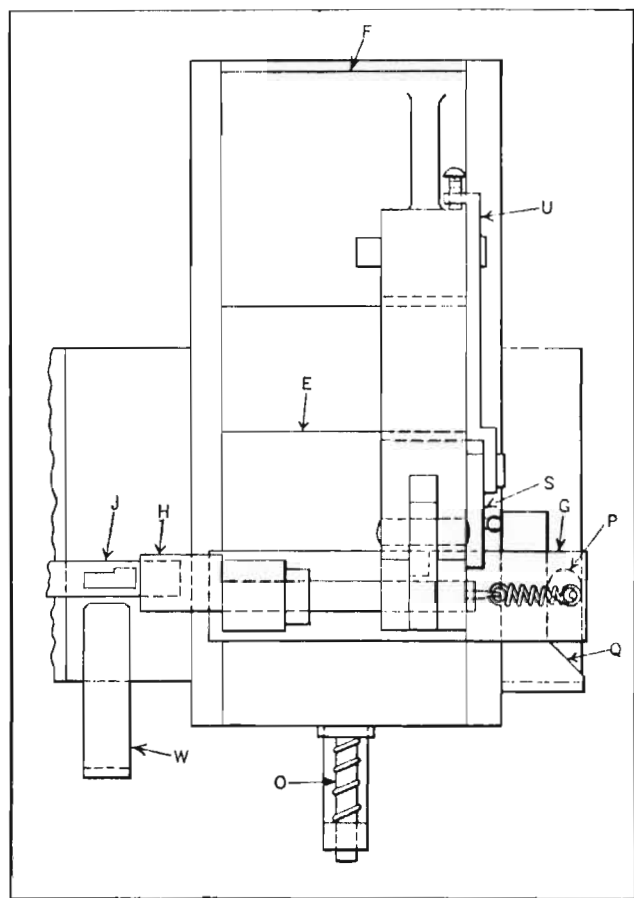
Plan View of Transfer Mechanism, Showing the Position of the Part after Entering the Transfer Member
